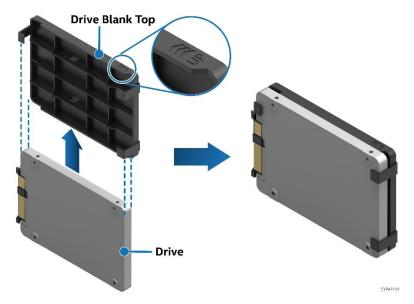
2.5" 7 mm Height Drive Assembly with Drive Blank
